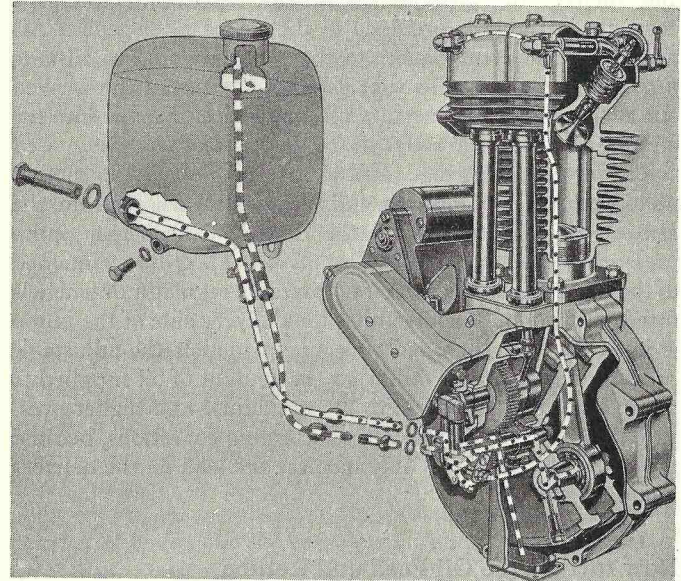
LUBRICATION SYSTEM INCORPORATED ON ALL SINGLE-CYLINDER MODELS (1933-59).
